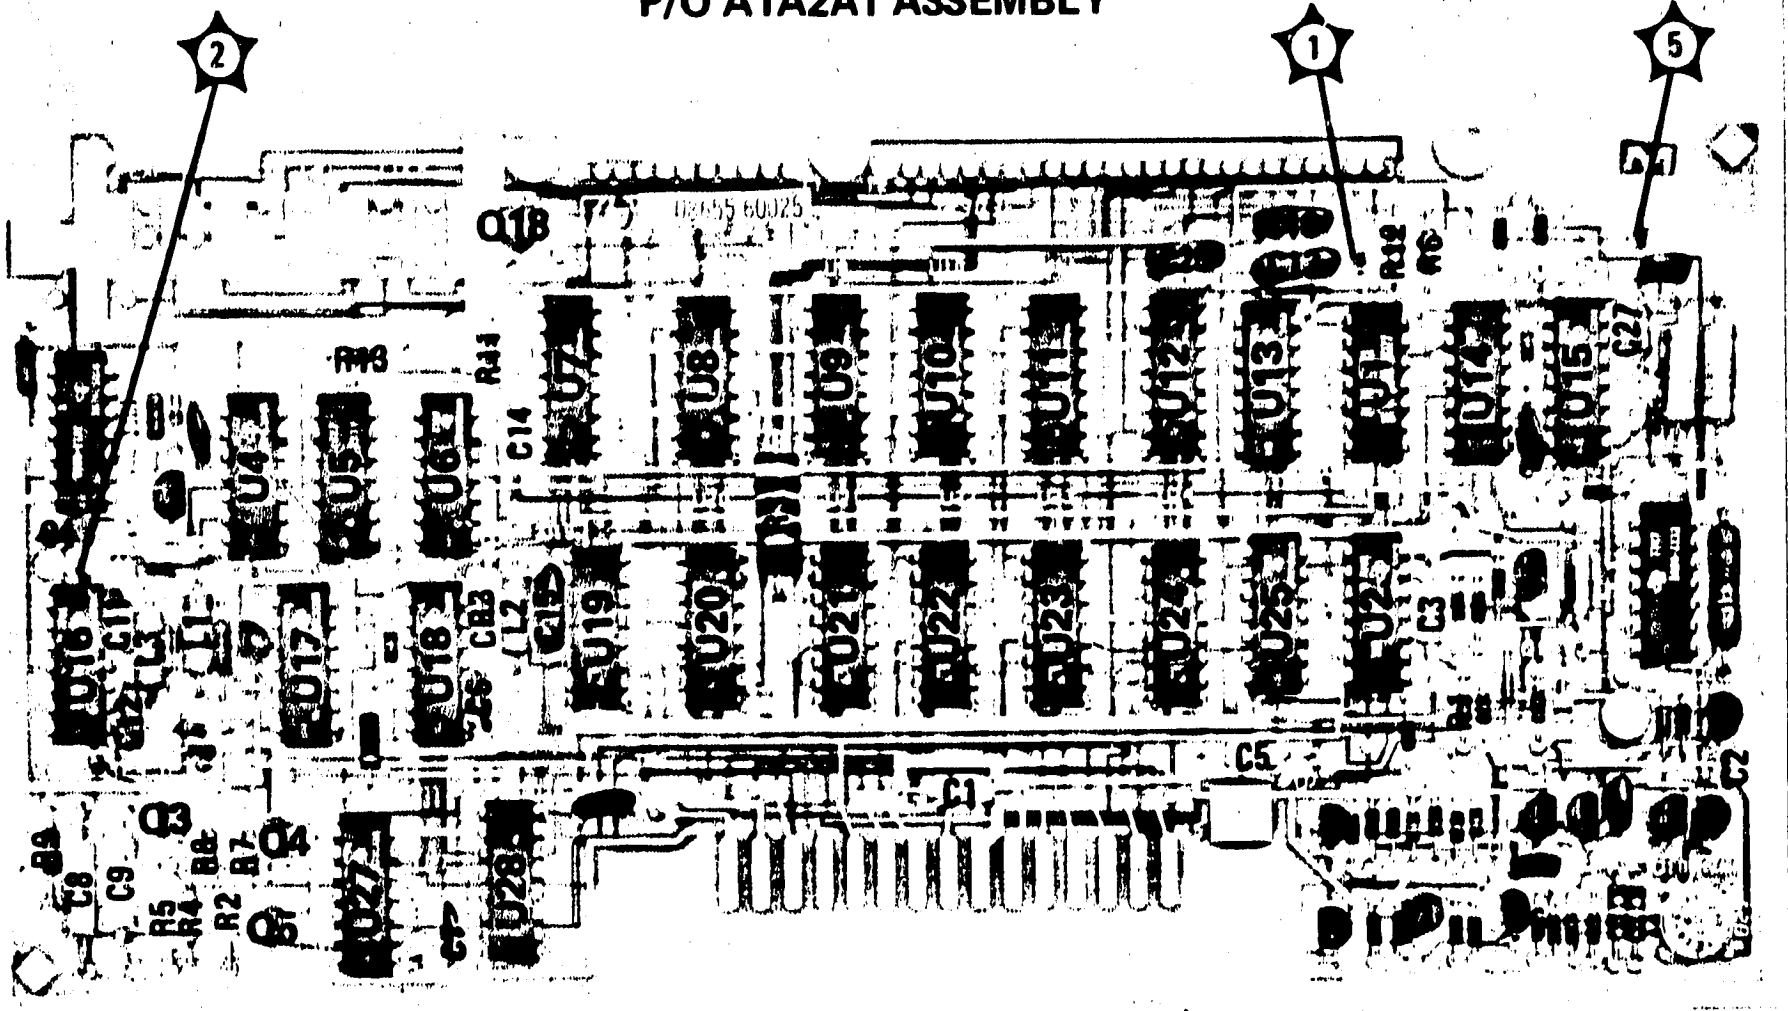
P/O A1A2A1 Counter/Lock Board Assembly (Up/Down Counter) Component Locations (P/O Change 6)
